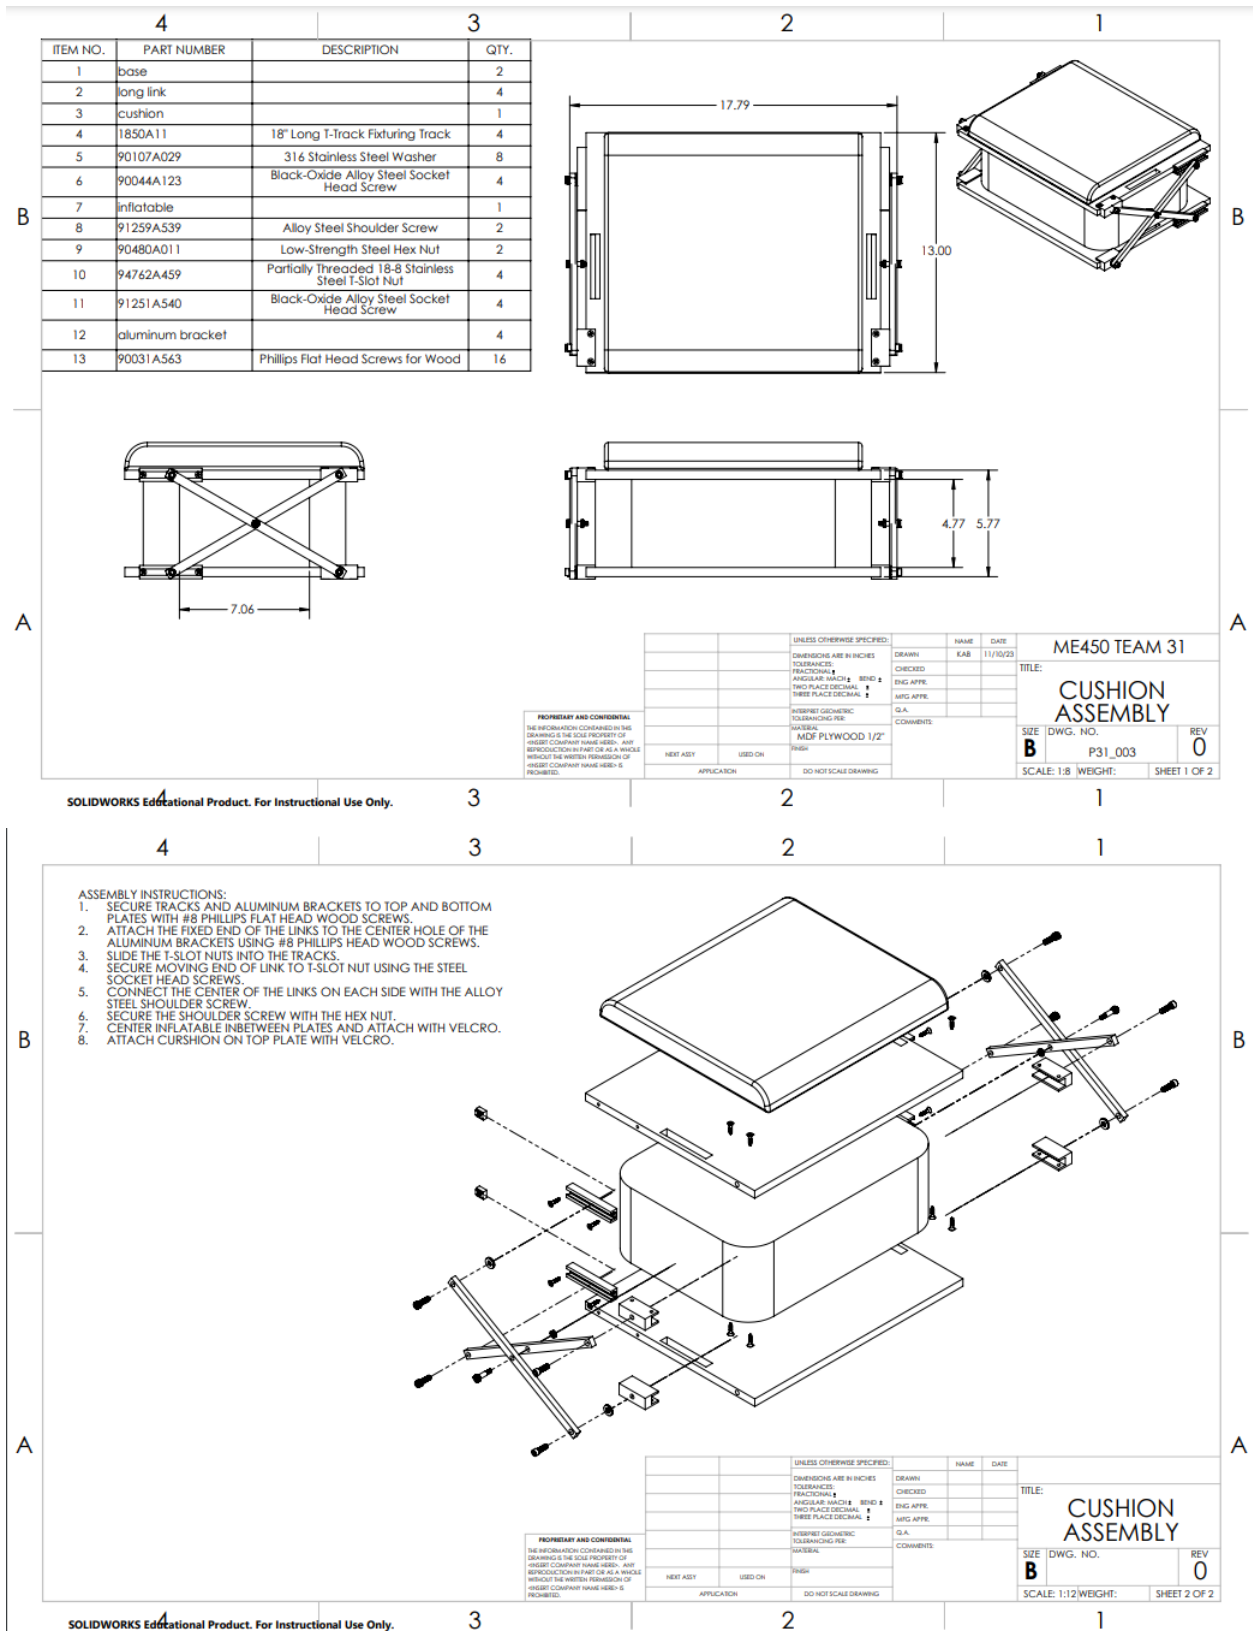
E. The BOM and assembly instructions for the inflatable cushion design.
